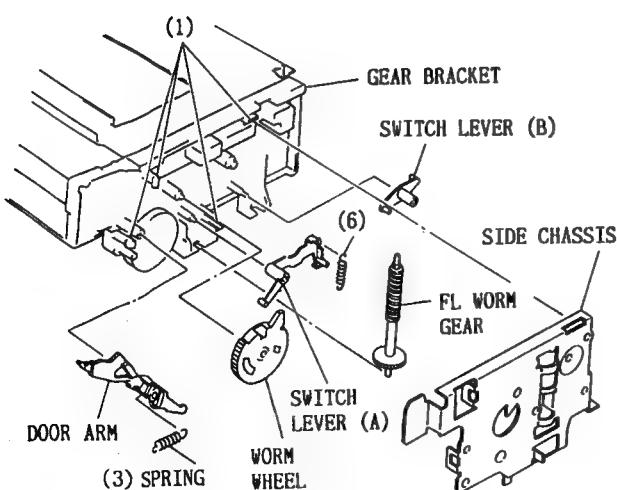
Side Chassis, FL Worm Gear, Door Arm, Worm Wheel and Switch Levers A/B
